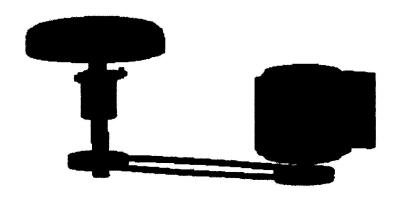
3D Design of the Motor, the Shaft, the Pulley, the Belt and the Rotating disc connected together
